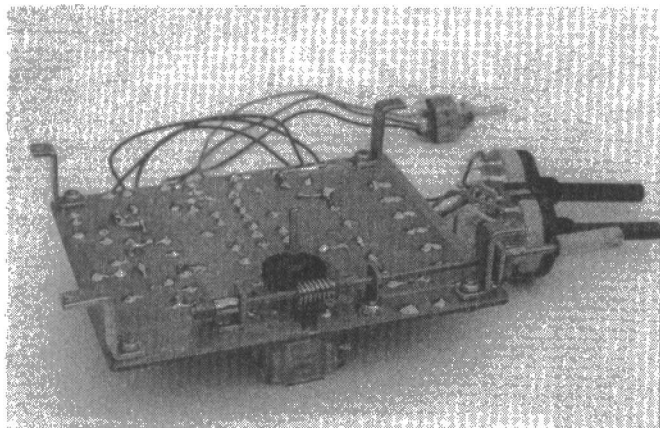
and the photographs illustrate the arrangement. The plastic gear wheel is clamped between washers and secured to the spindle of the tuning capacitor by means of a 25mm long bolt or length of studding (2mm diameter metric thread) which also carries the dial pointer. Lock nuts hold the wheel and the pointer firmly in place. When tightening up the fixings, grip the actual capacitor spindle
